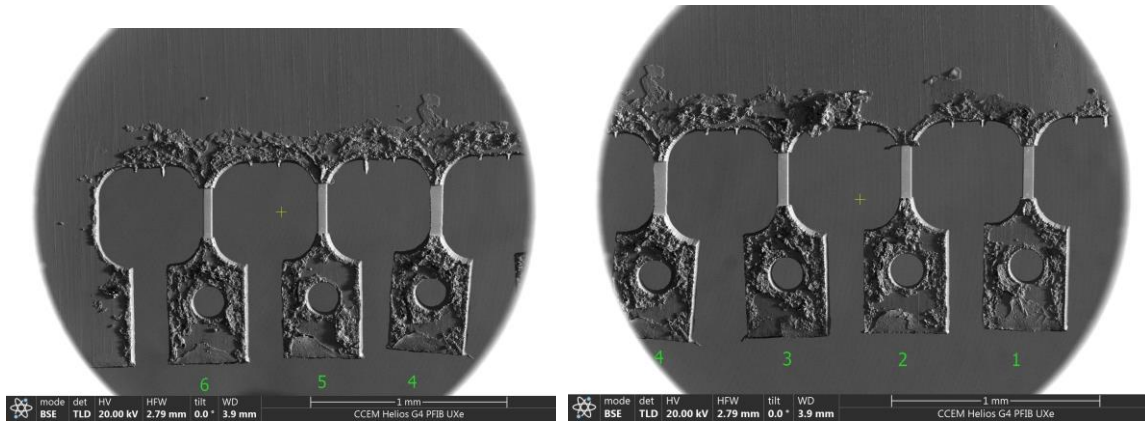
Final fabrication state of fs-laser-machined copper micro-tensile specimens from wedge 1.
